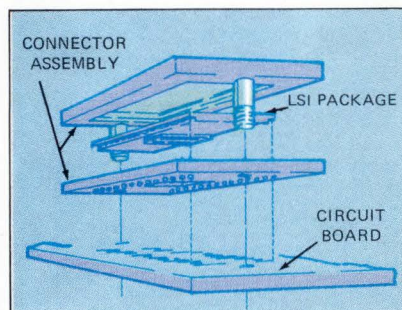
Zero insertion pressure mounts for leadless MOS/LSI packages provide a pinless, solderless, gas-tight connection between the package and the PC board.
